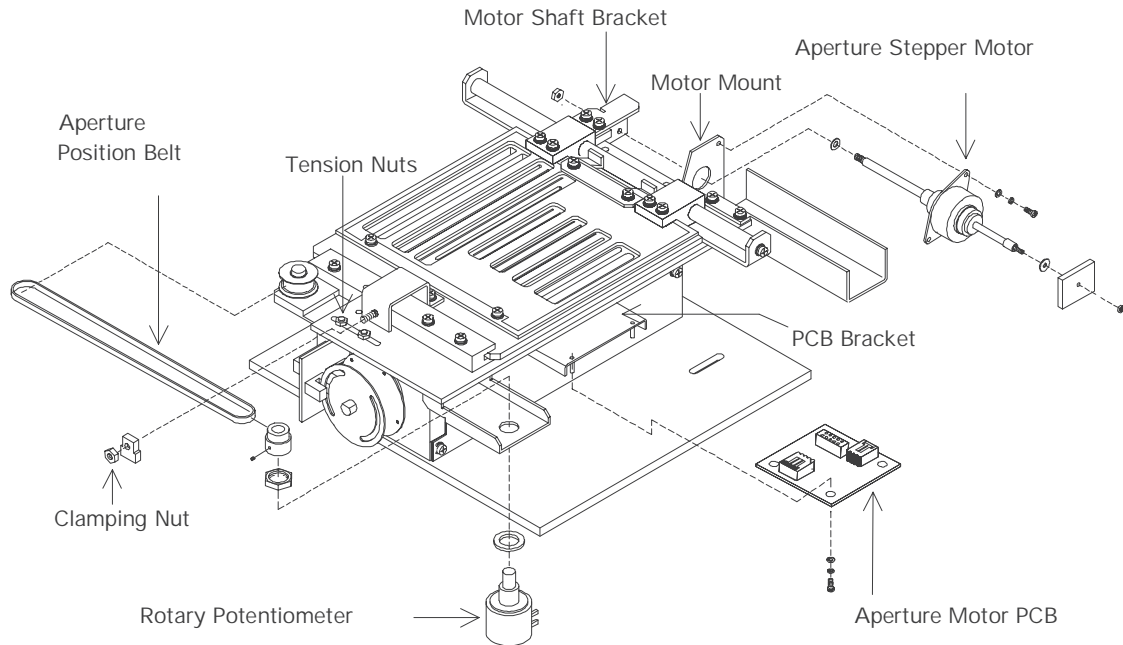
Aperture Assembly FRUs (QDR 4500A and SL)
